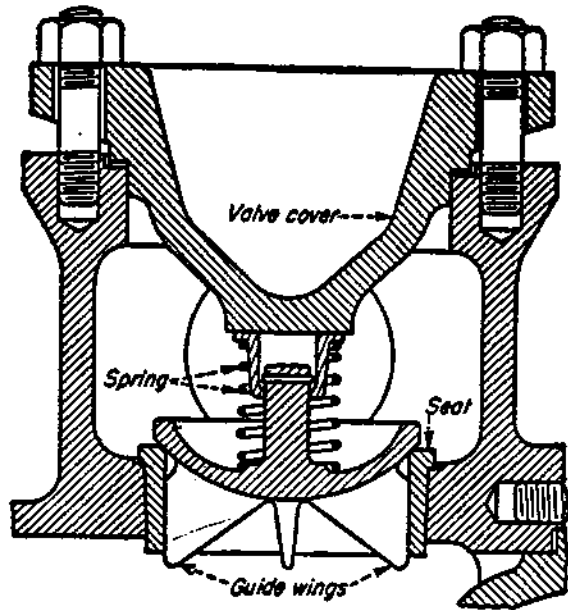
Wing-guided valve for medium pressure may be either flat or bevel-faced.
